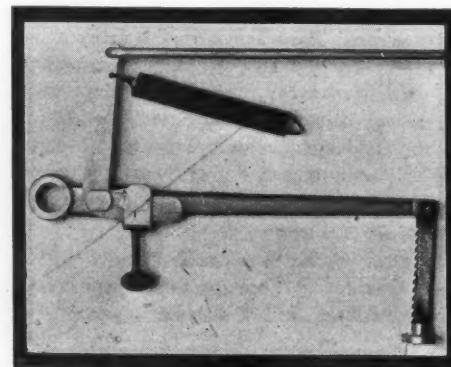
UTILITY EMERGENCY BRAKE MEMBERS
